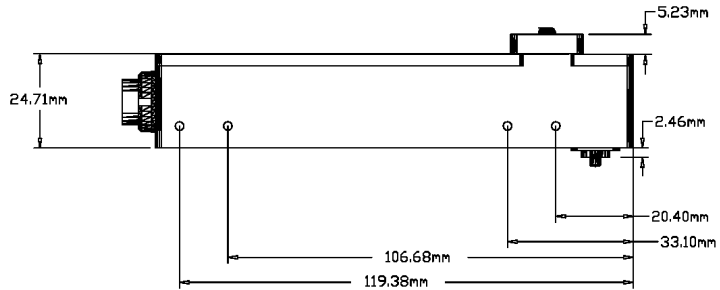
ETKS3.0_SET Dimensions - Side View with Glenair Cover
